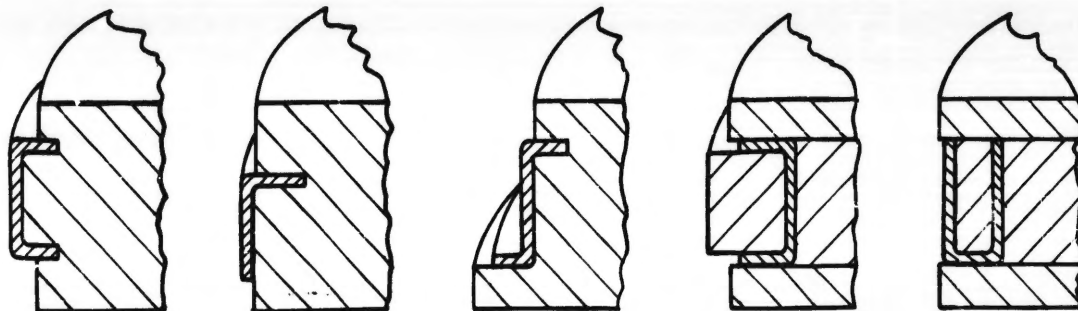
Stretch Forming Parts With Outstanding Legs
